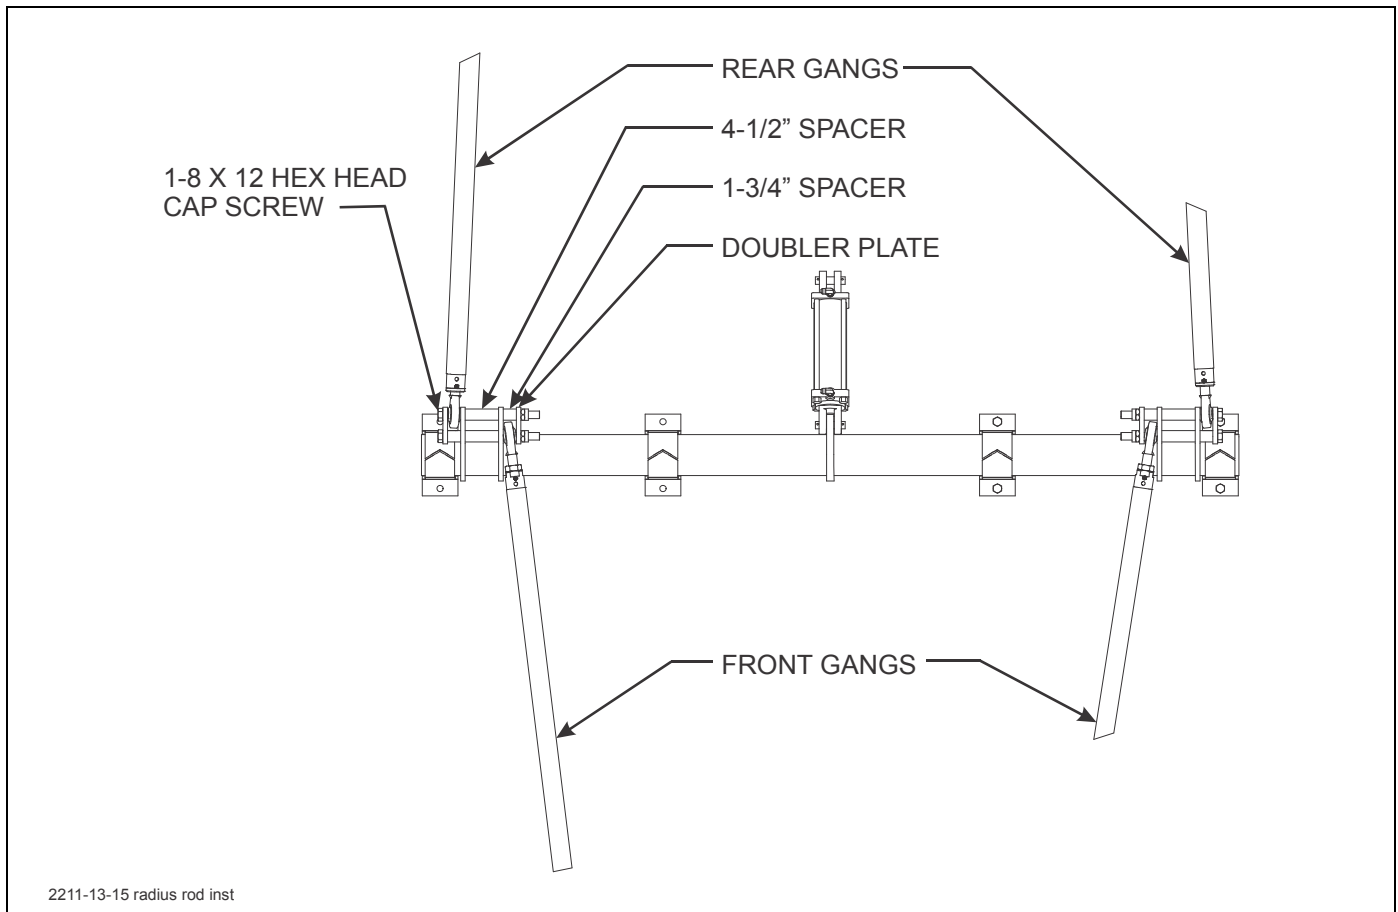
Top View of Radius Rod Installation - 2211-13 & -15
